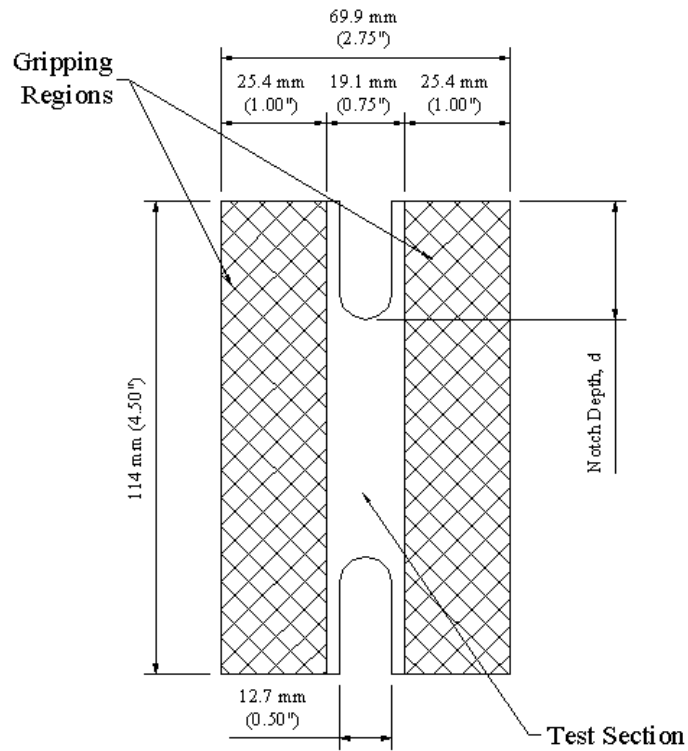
U-NOTCHED SPECIMEN DIMENSIONS
